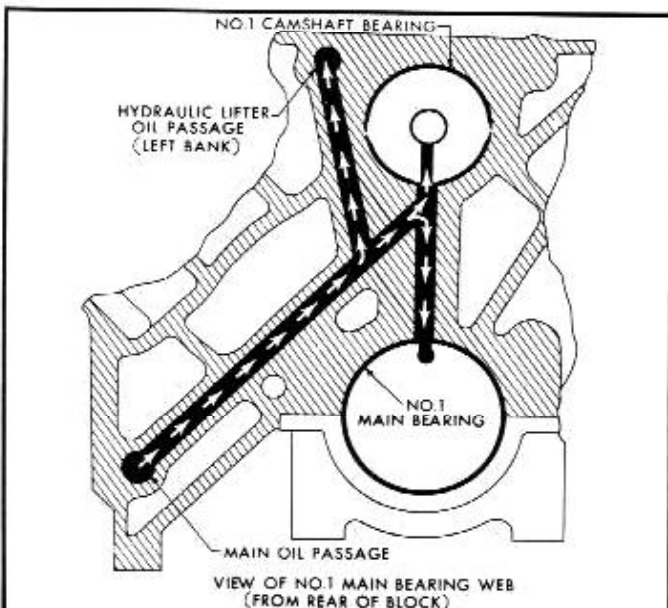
C-6—Lubrication at No. 1 Main Bearing Web
